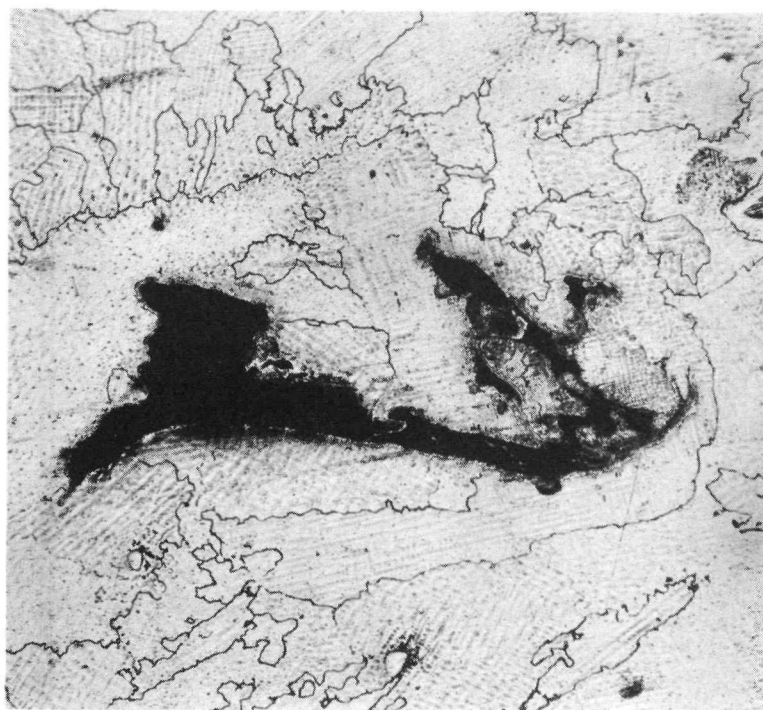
TIG WELD DEFECT ON FACE WELD ON SPECIMEN 2; MAGN 85X
